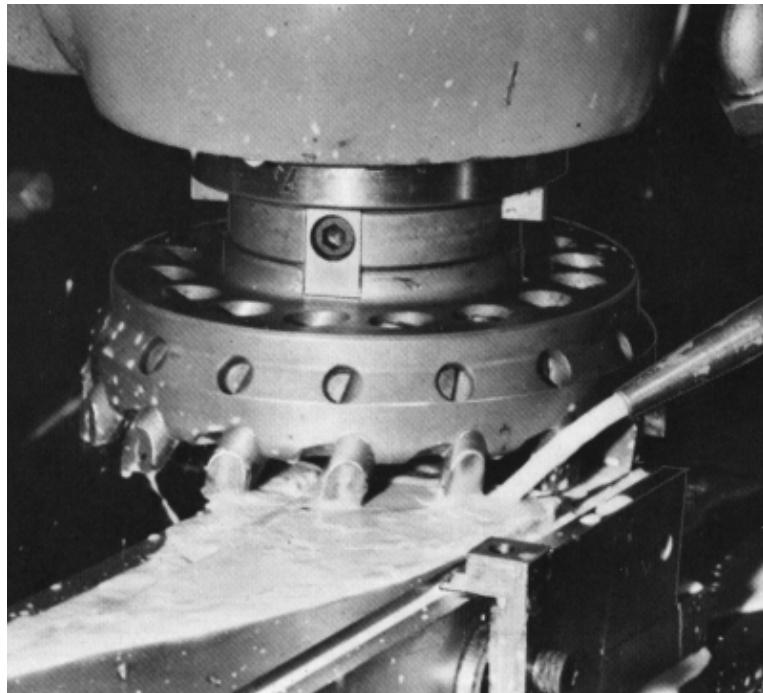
Face milling in a vertical-spindle machine. When it is necessary to create a flat face on a large part, this can be done best with a facing cutter. A cutter about 25 mm wider than the workpiece allows the facing can be accomplished in one pass. Note the use of copious quantities of lubricant.
